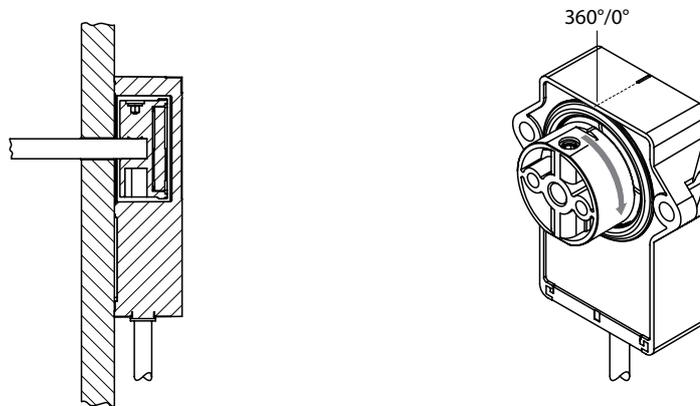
Mounting the positioning element in the housing      Fig. 22: Aligning the positioning element
